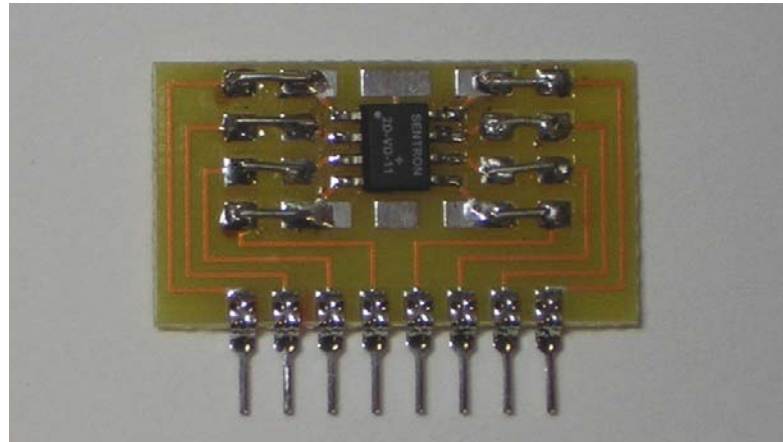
Photograph of the 2D-VH-11SO mounted on an IC board
